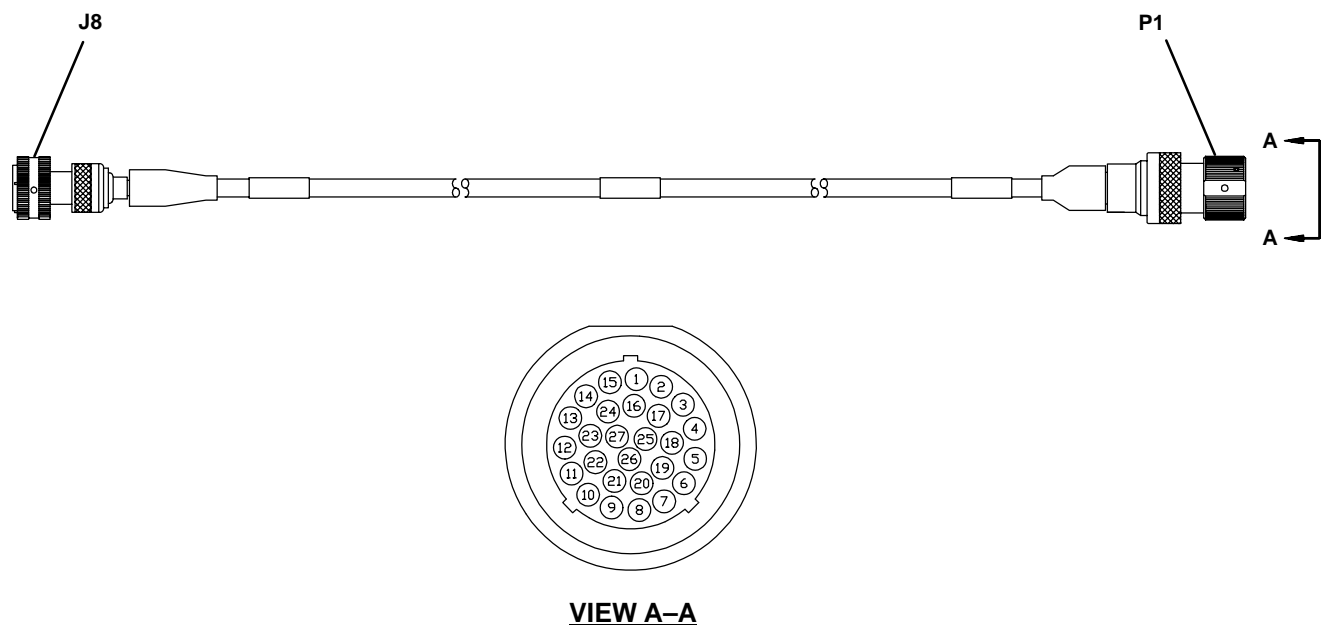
DC Power Cable Assembly (10181-9827 Rev. F)
